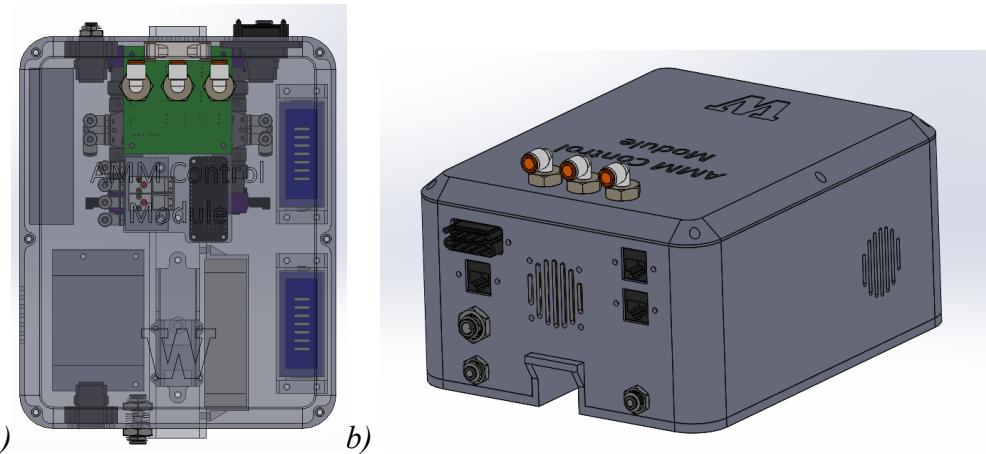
a) The AMM control module and the internal components. b) The exterior of the AMM control module.
